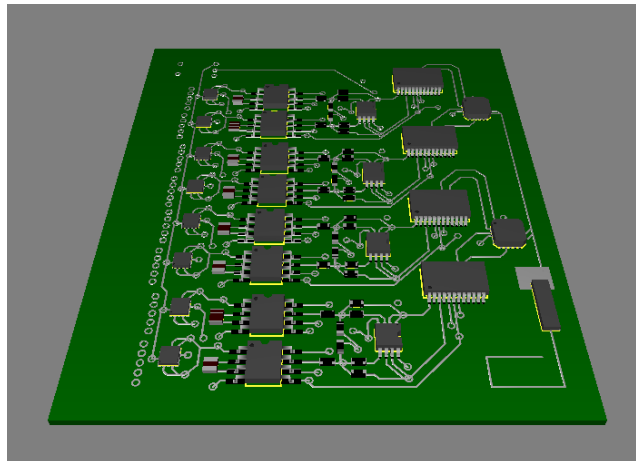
Three Dimensional CAD drawing of the printed circuit board. This is the front side of the circuit board, containing all of the amplifiers, microchips, and the telemeter.
